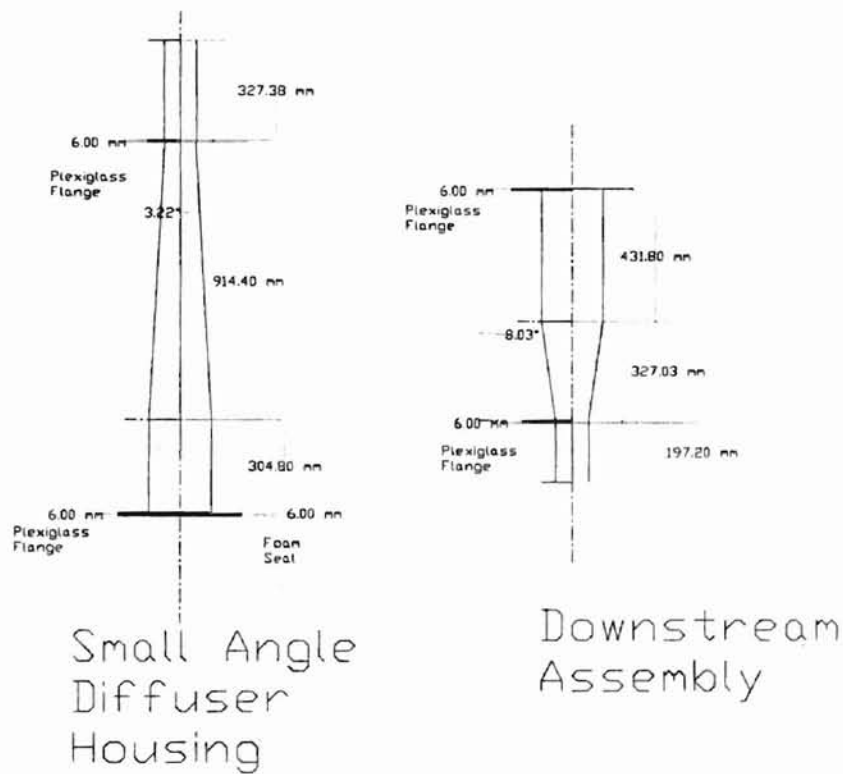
Front Views of Upstream and Downstream Small Angle Diffuser Housing Components
